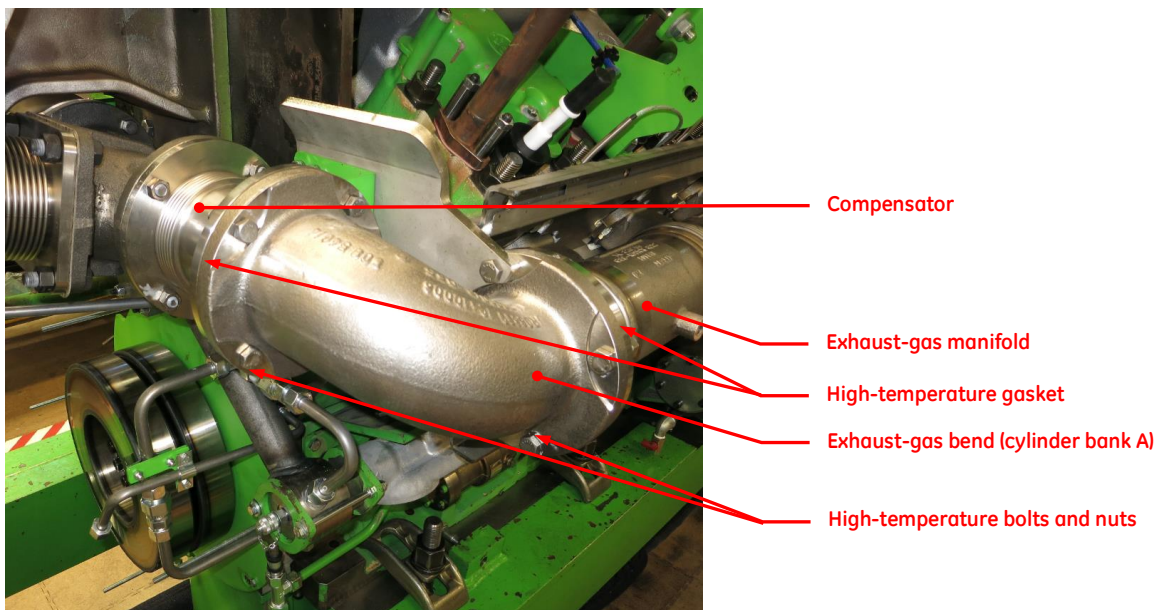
Fitting the exhaust-gas bends (cylinder bank A)
